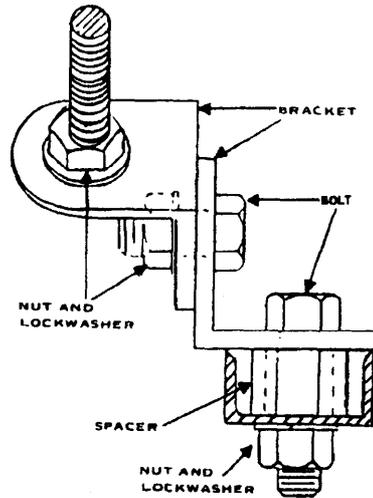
Typical Truss Assembly Single-Channel, Lower-Junction Fastening Methods.
